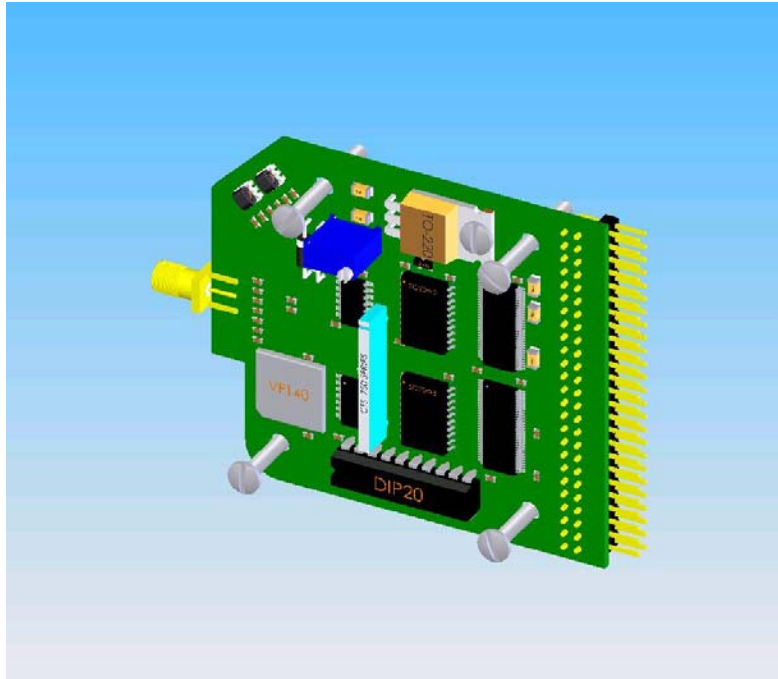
Circuitworks translation of IDF file from PCAD layout to 3D definition of PCB with holes.
